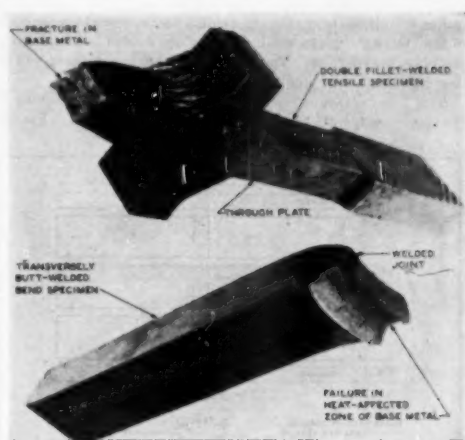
TYPICAL FRACTURES IN FILLET-WELDED TENSILE AND BUTT-WELDED BEND SPECIMENS OF 1-IN. QUENCHED-AND-TEMPERED T-1 STEEL (E12015 electrode.)
